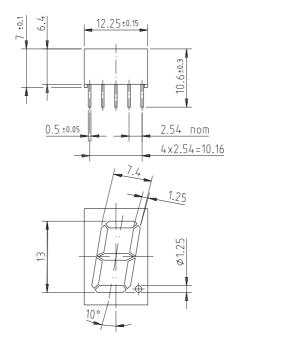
Issue: 1; 21.11.95 95 11344
